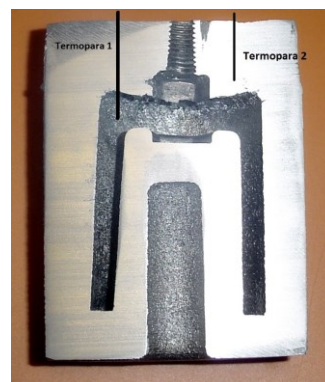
Cross – section of test casting made at investigations of the gas emission from surface layers of the mould
